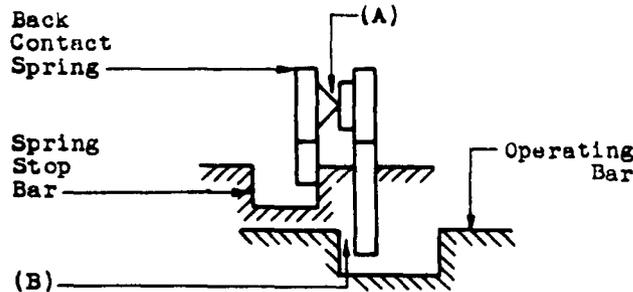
Operating Spring Pressure and Clearance Between Operating Spring and Operating Bar - Break Spring Combination
